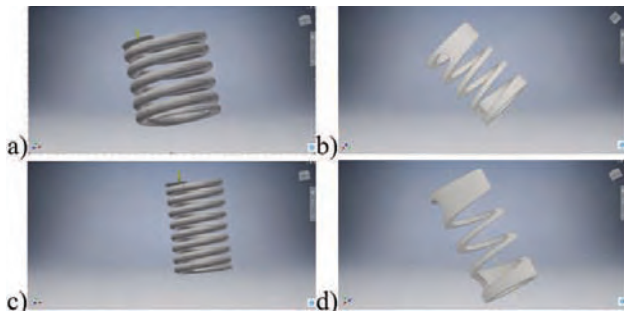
Coil springs: a) outer, c) inner and machined springs: b) outer, d) inner used in the analyzed valve train
